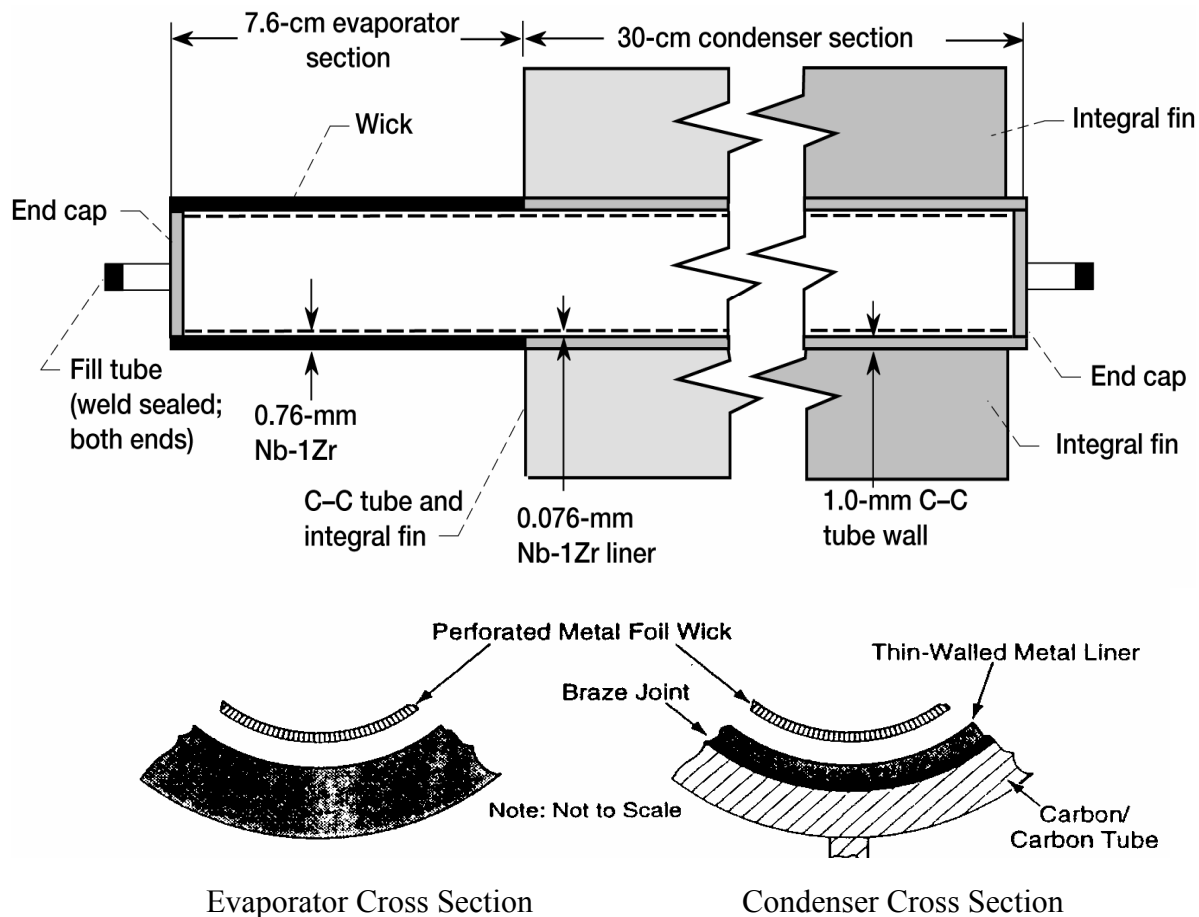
Carbon—Carbon Heat Pipe Design Details.
